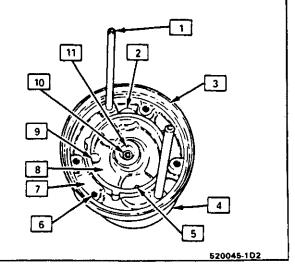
Detail of Compressor Rear Head-Assembly Guide Pins Installed
